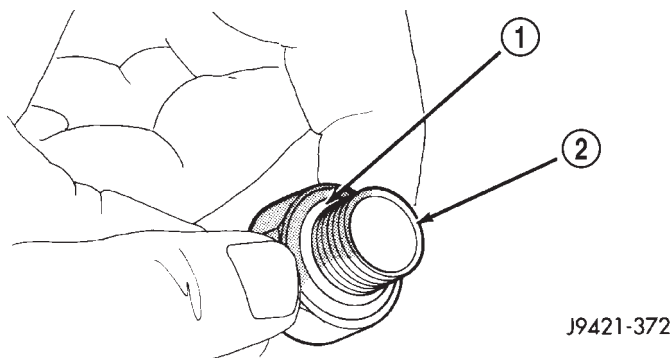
O-Ring Installation On Poppet Plunger Screw
